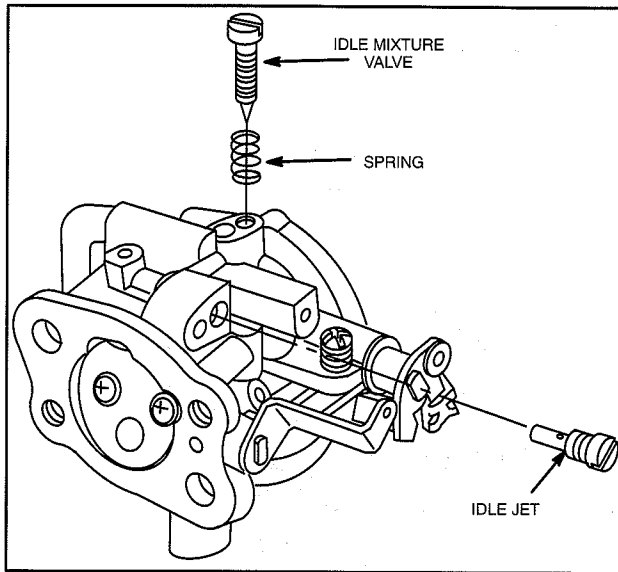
Installing Idle Jet and Idle Mixture Valve
